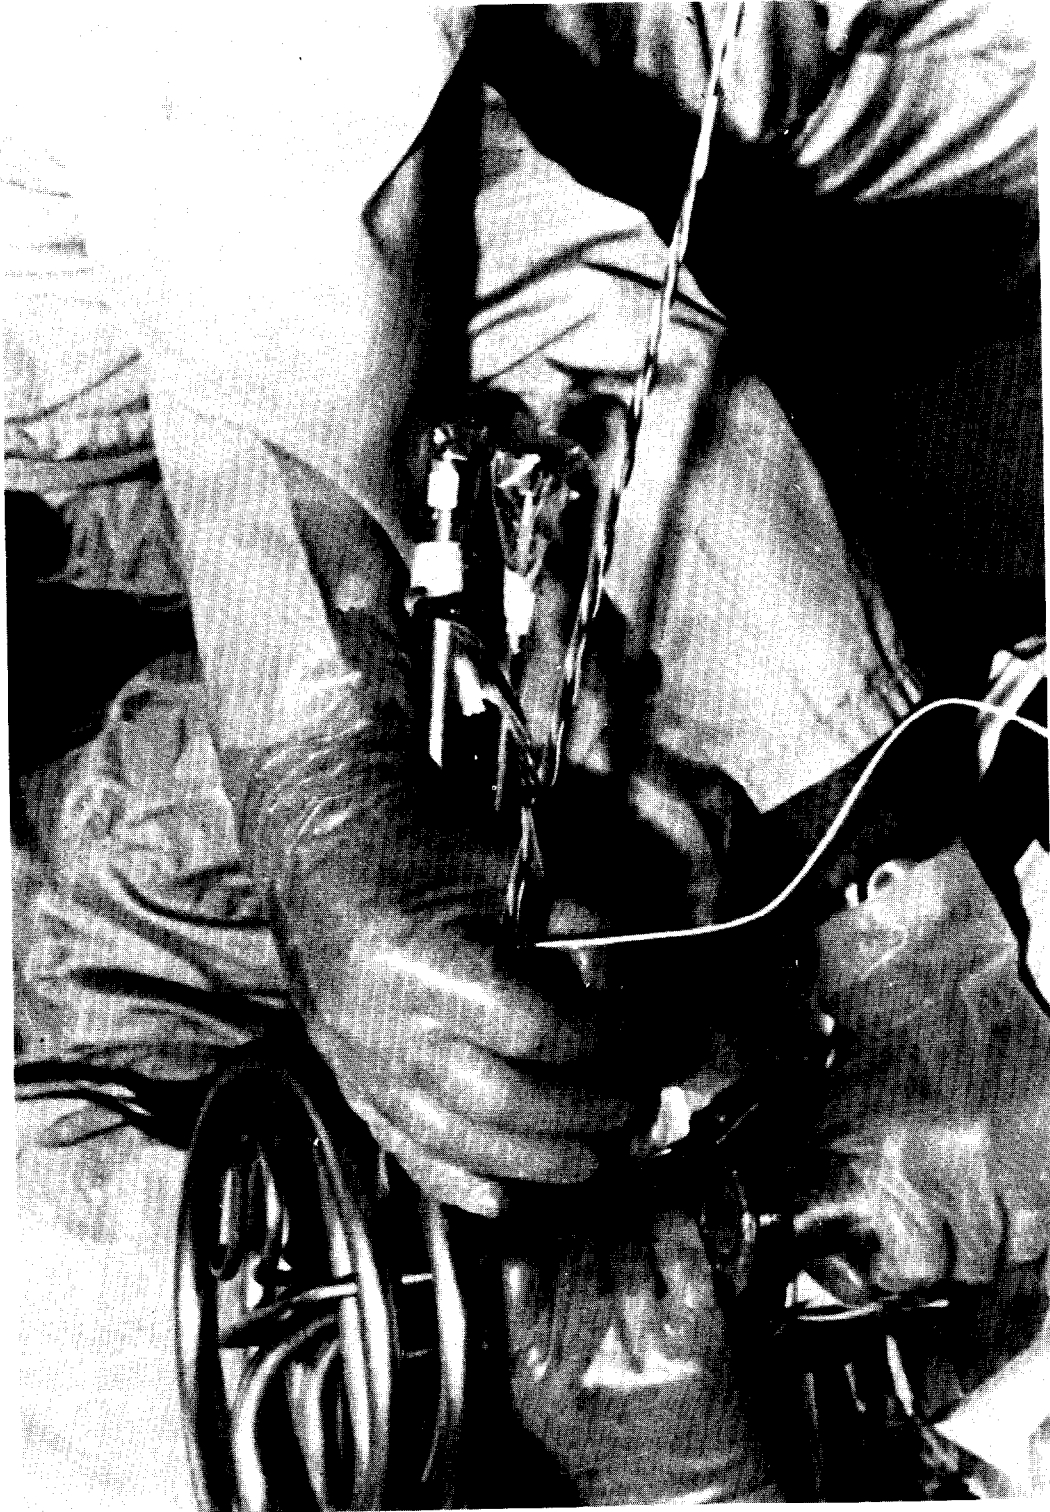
First bundle of heater and fan motor leads pulled through upper coil assembly.
